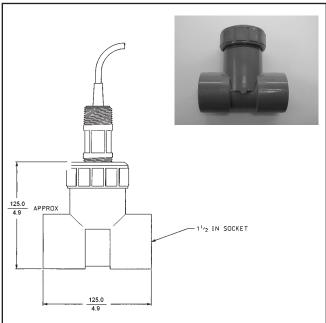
1½ in. tee with 1½ in. socket process connection (PN 23567-00) shown with a Model 499A amperometric sensor. The tee assembly is offered with a sensor mounting adapter that allows the user to remove the sensor without twisting the cable.
